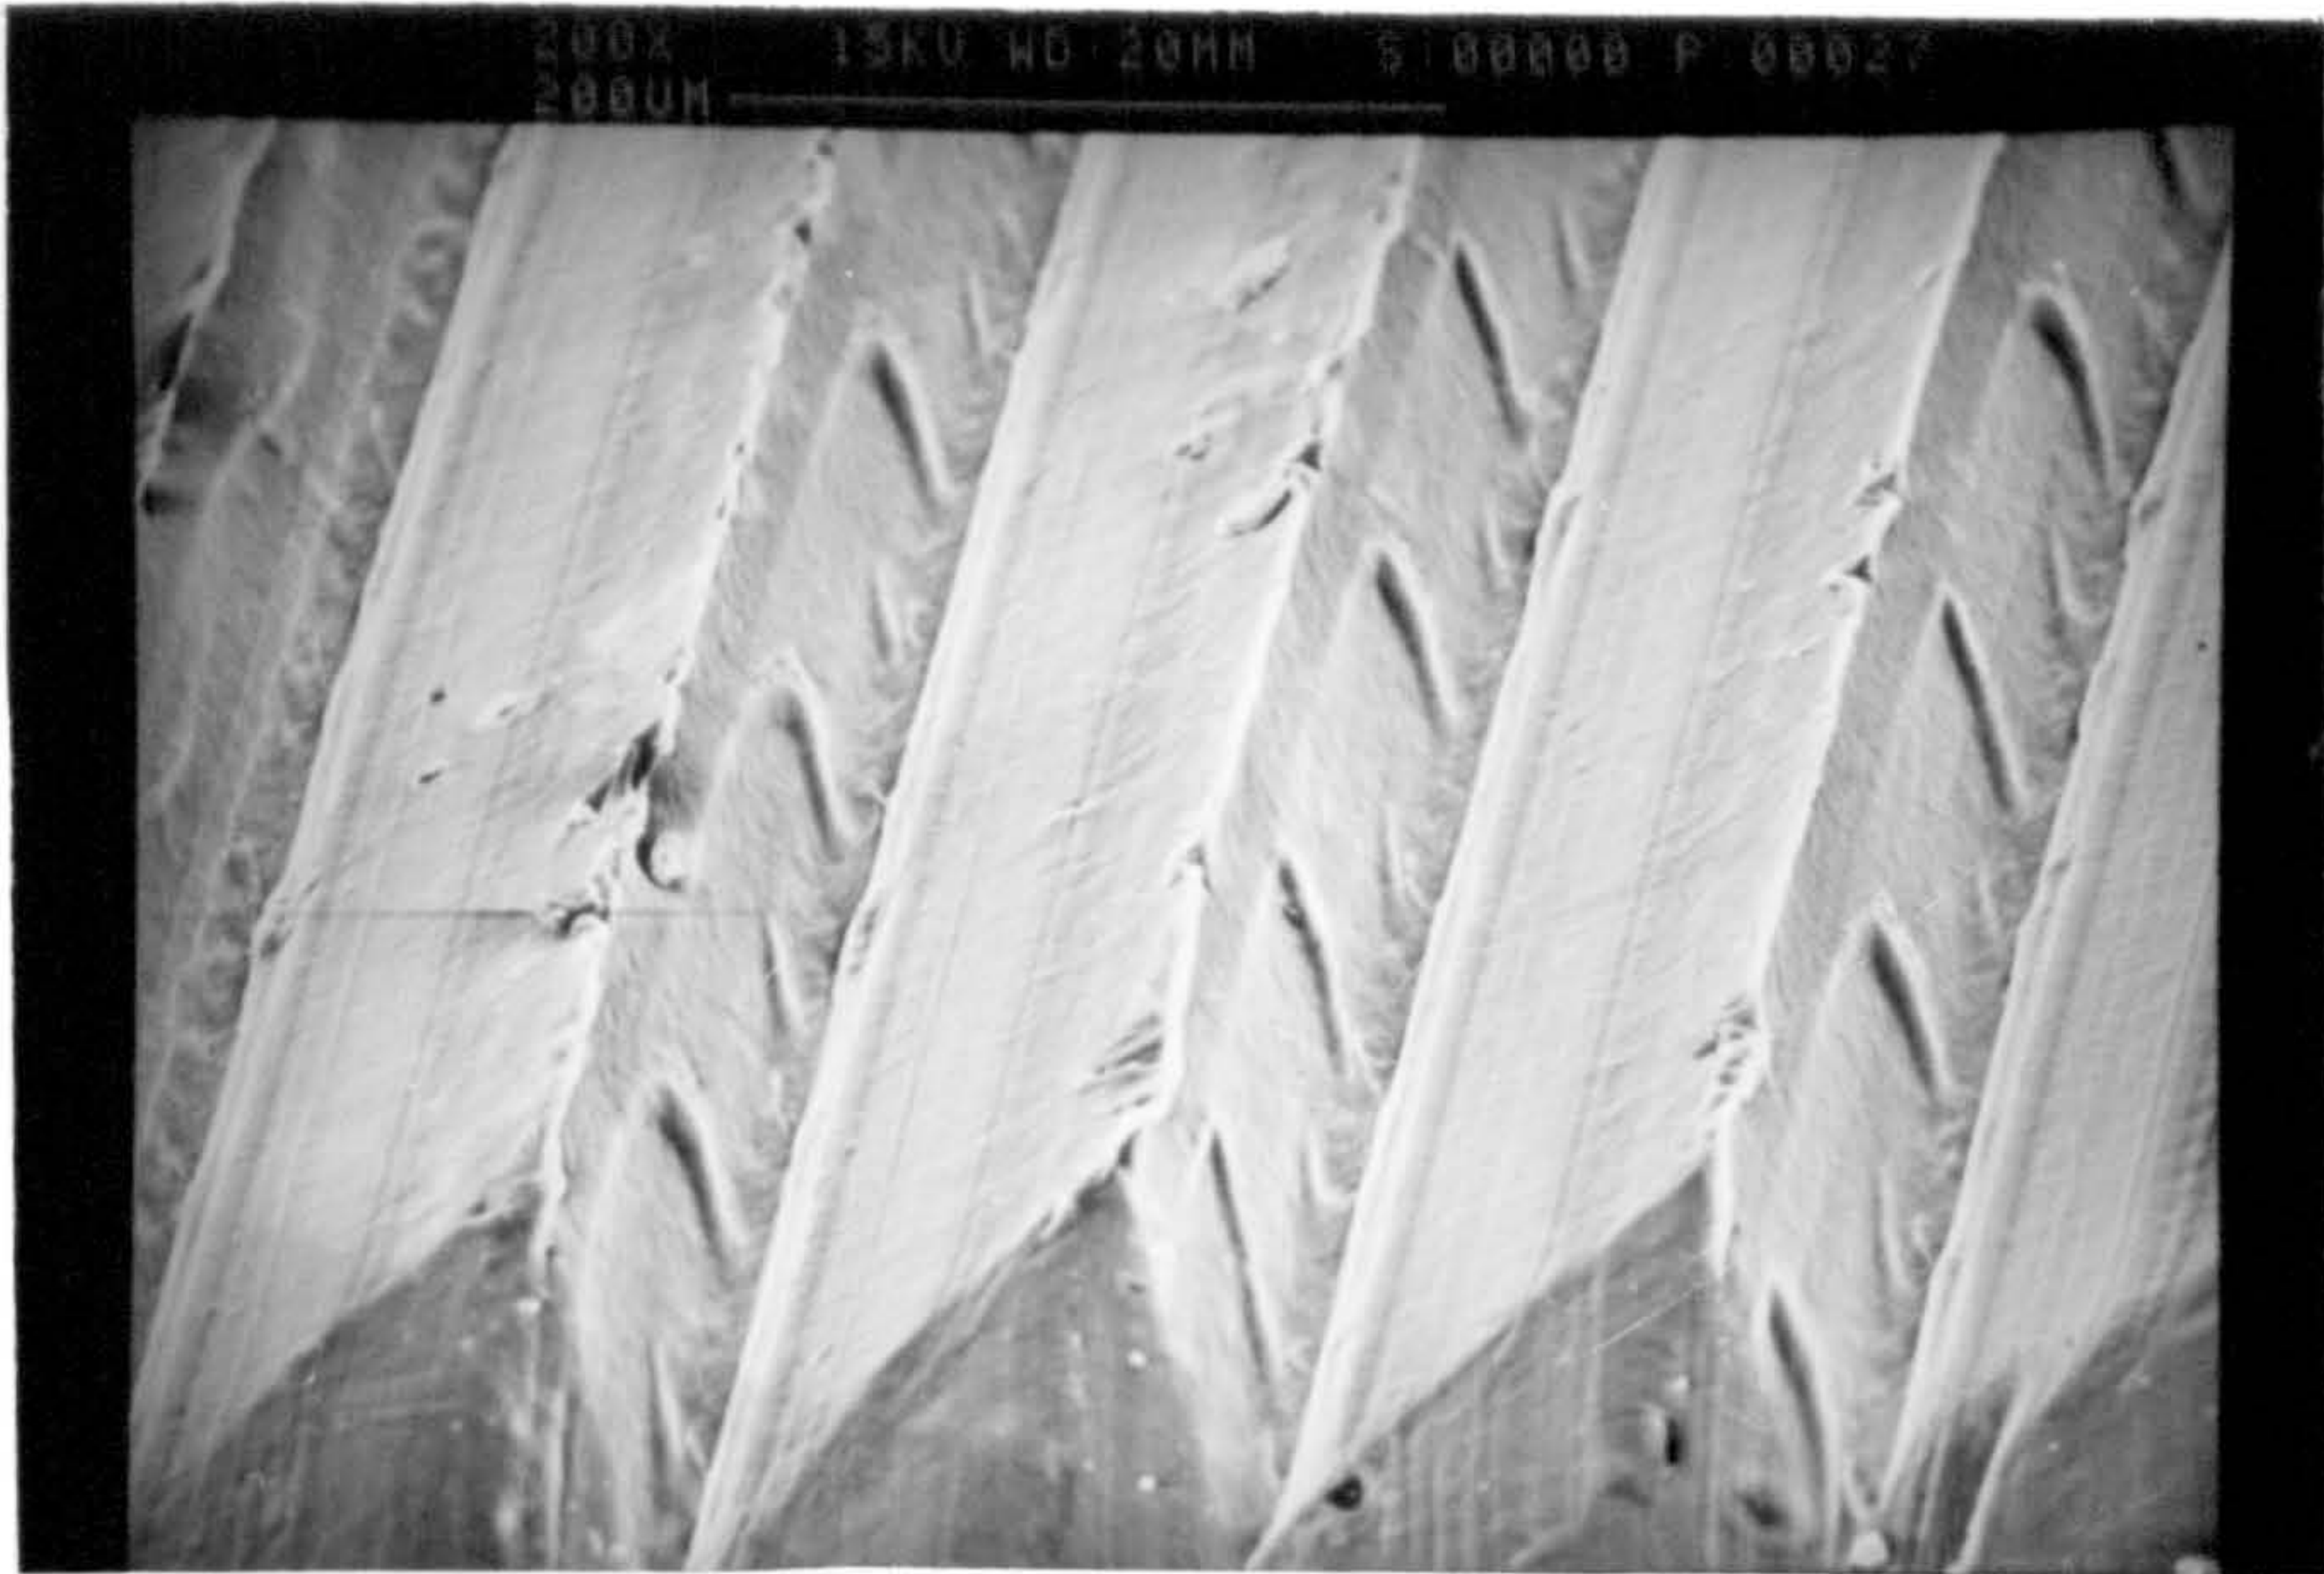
HDPE surface machined at  $0^\circ$  rake angle, showing good surface finish. (Speed = 25 m/min, feed = 0.16 mm/rev)
